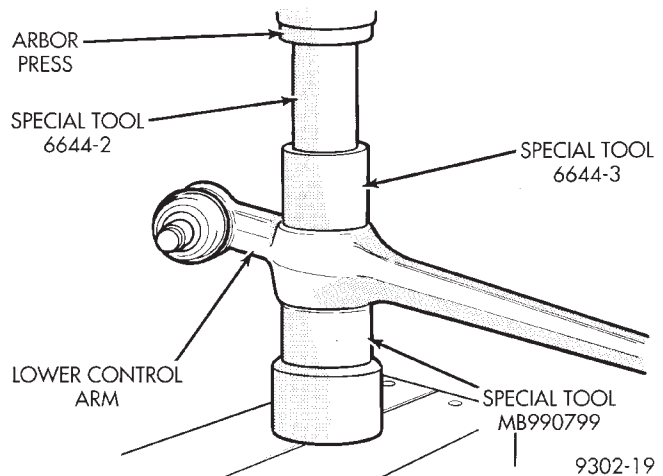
Installing Tension Strut Bushing Into Lower Control Arm
